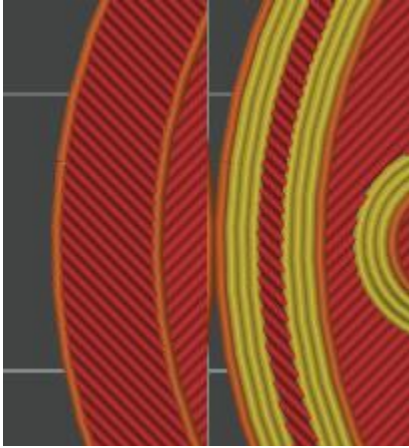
TRACK PROFILES FOR 1 WALL (LEFT) AND 4 WALL (RIGHT) SAMPLES. TOP SURFACE FILL LABELED RED, WALL LOOPS IN ORANGE (EXTERIOR) AND YELLOW (INTERIOR).
